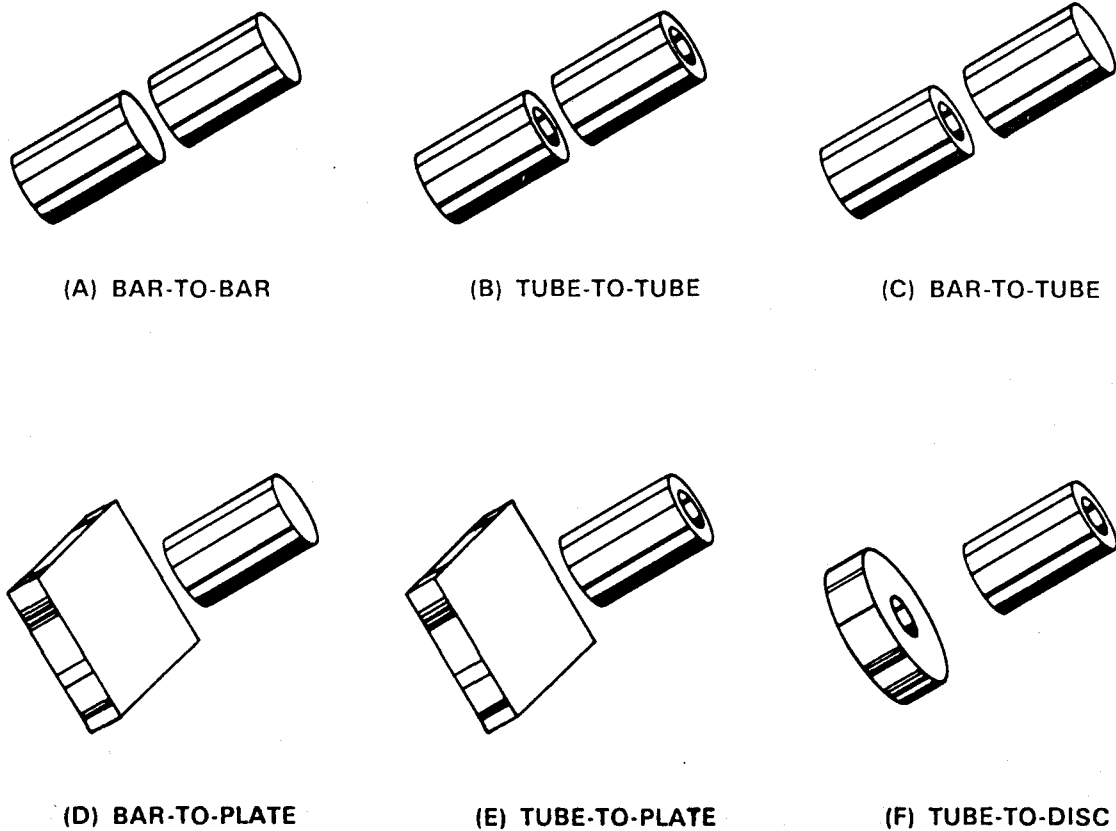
Typical Friction Weld Joint Applications
